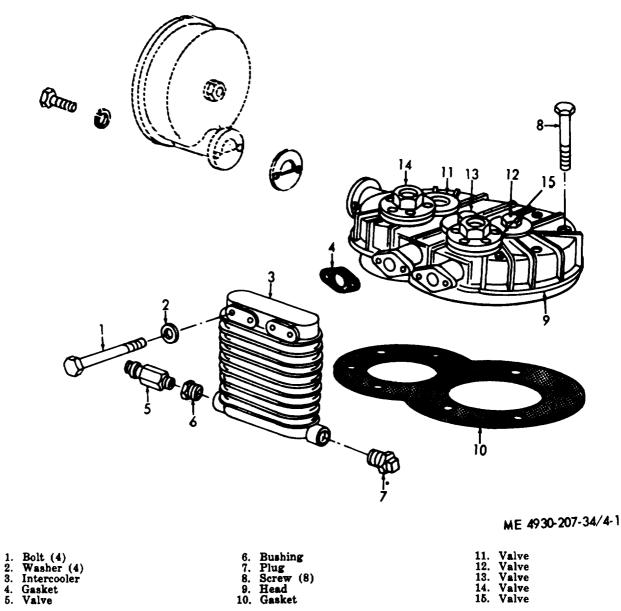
Cylinder head, valves, and intercooler, disassembly and reassembly.
